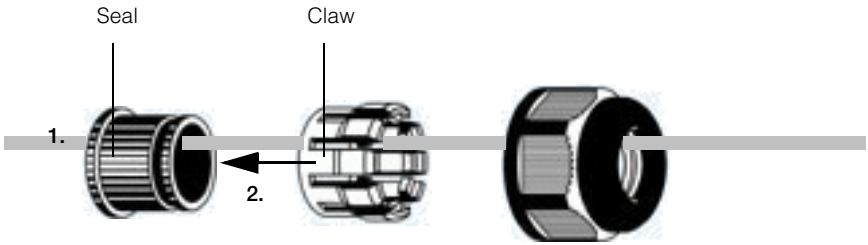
Inserting the cables into the seal and assembling the claw and seal
